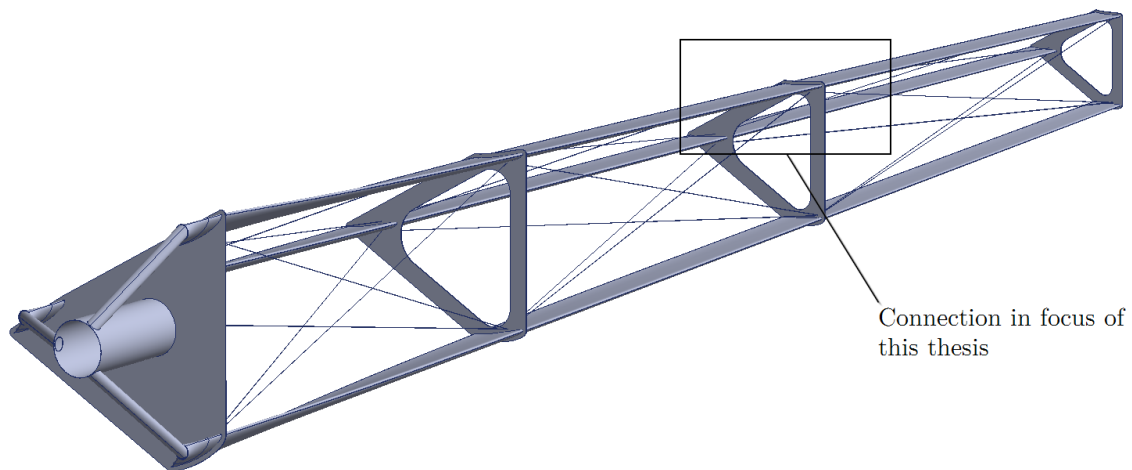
The connection in the scope of this thesis shown in a principal CAD drawing of the Triblade.
